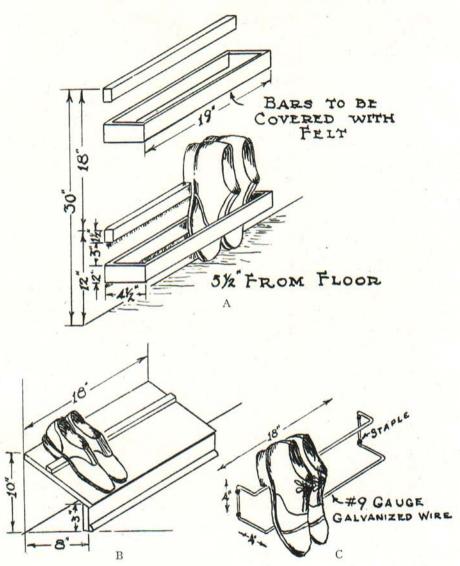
The shoe rack in Fig. 11A is for use where wall space is less limited than floor space. Fig. 11B shows how space may be used below garments on hooks.
